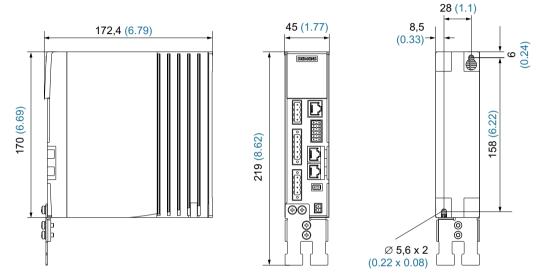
Dimension drawing SINAMICS S210 FSA, 1 AC, dimensions in mm (inch)
